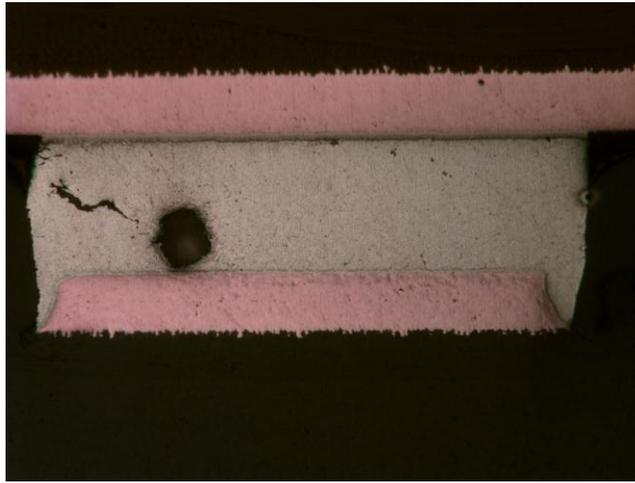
Cross Section Images of QFN Component After 3000 Cycles. Crack initiated at the solder joint, not at the void area.
